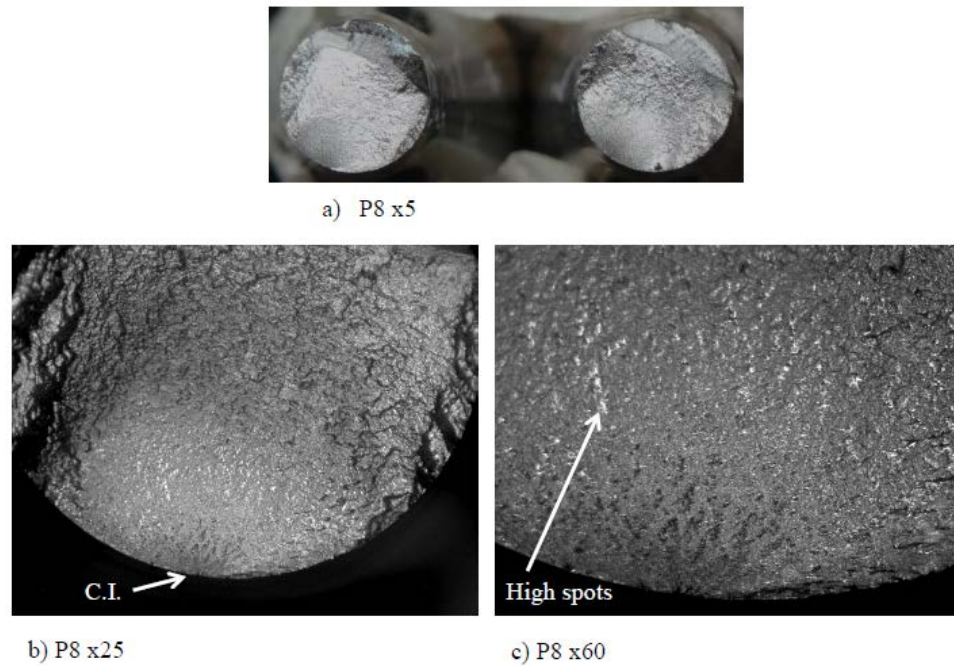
Fracture surface of a constant amplitude specimen a) full fracture surface b) crack initiation site c) high spots [5].
